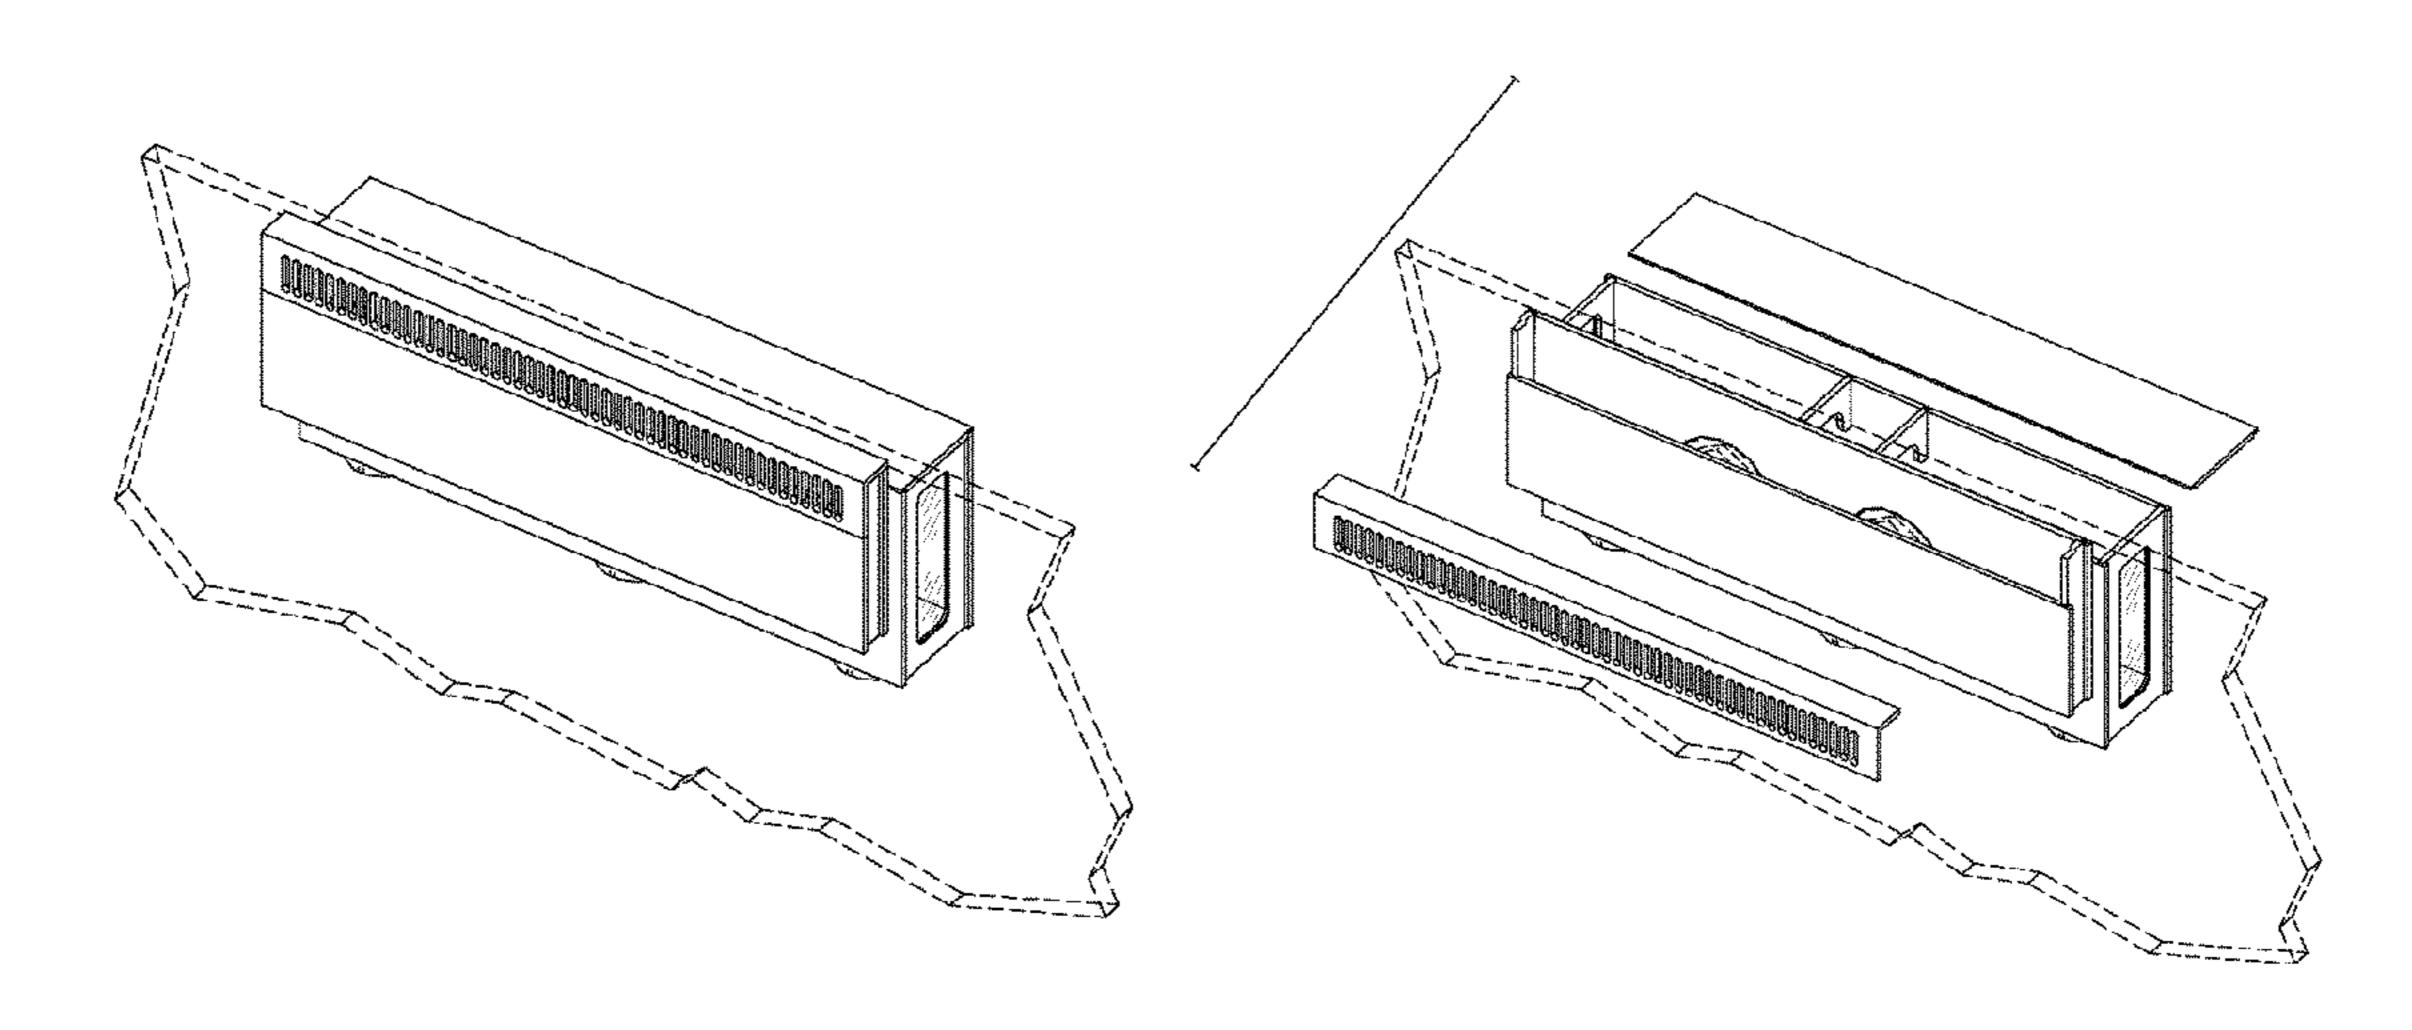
is a perspective view taken along the top left rear thereof showing a cutaway view of the rear face of the the external overflow box; and,
